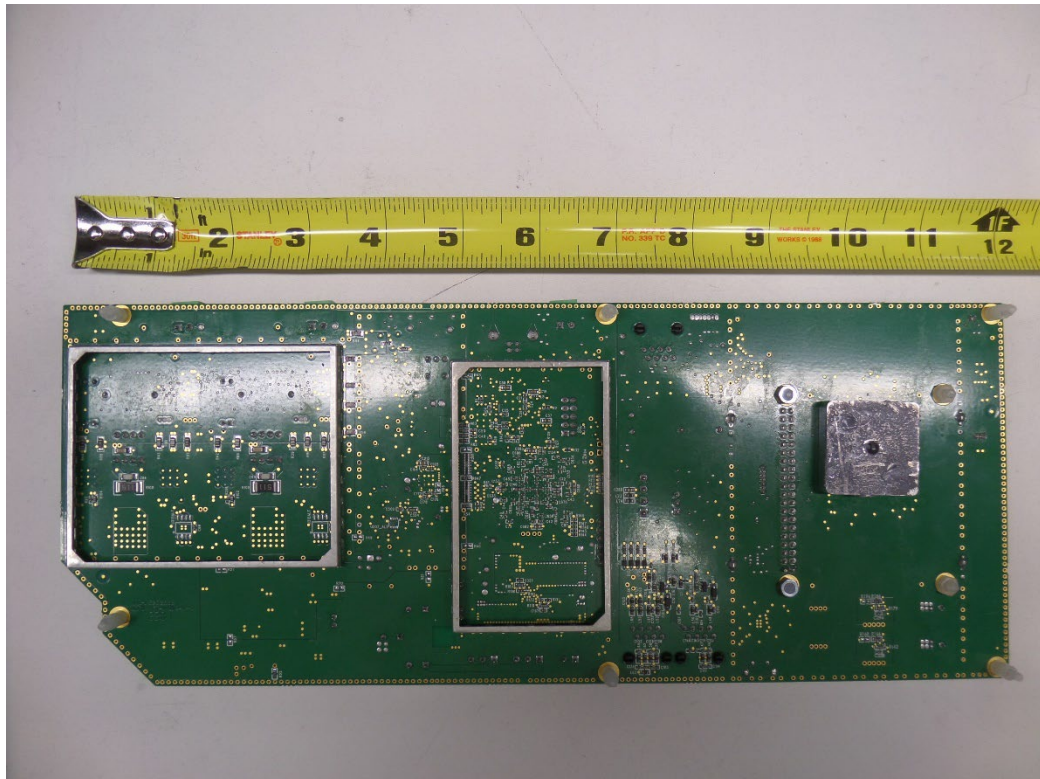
NP12 PRI/PAB LOWER BASE EAS RF BOARD BOTTOM SIDE WITHOUT SHIELDS
